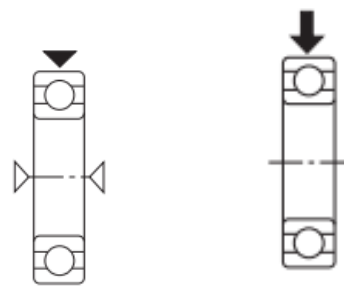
Loading in Deep groove ball bearing (Axial and Radial with Axial combined) [8]
